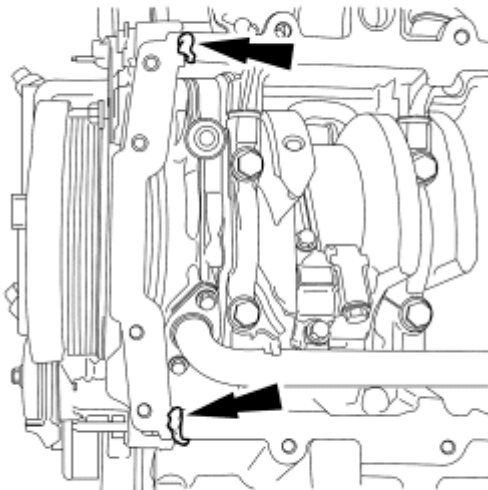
Applying Sealant To Engine Front Cover-To-Cylinder Block Surface
